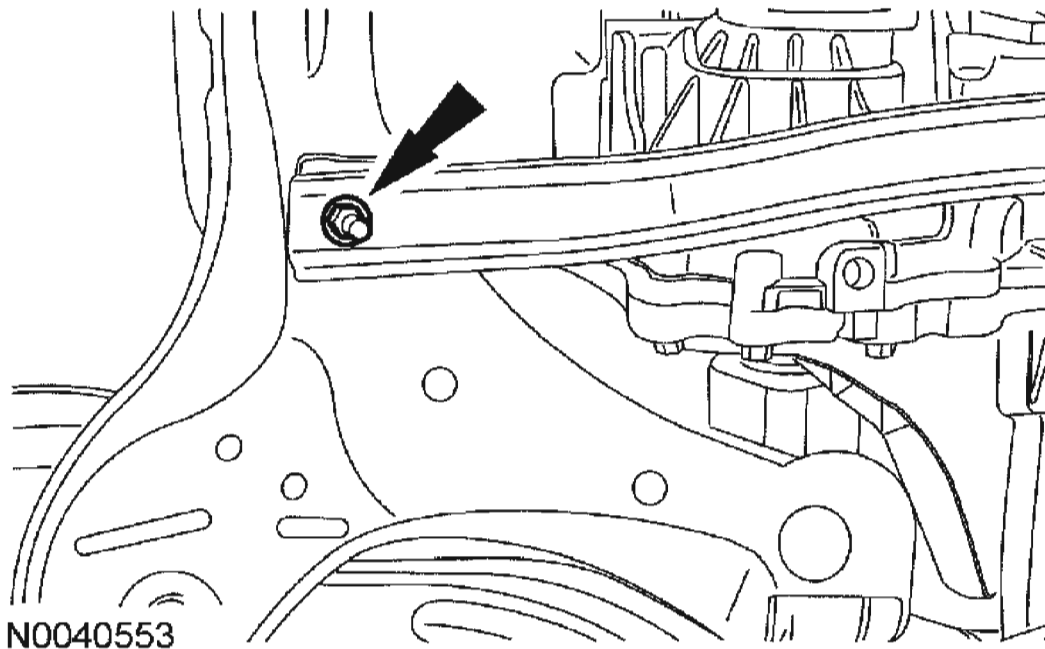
Removing Crossmember Bolts And Crossmember
